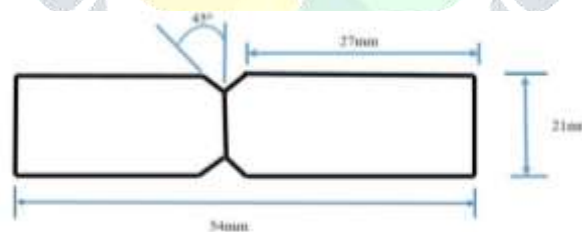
Line diagram of desired dimension of specimen for welding
